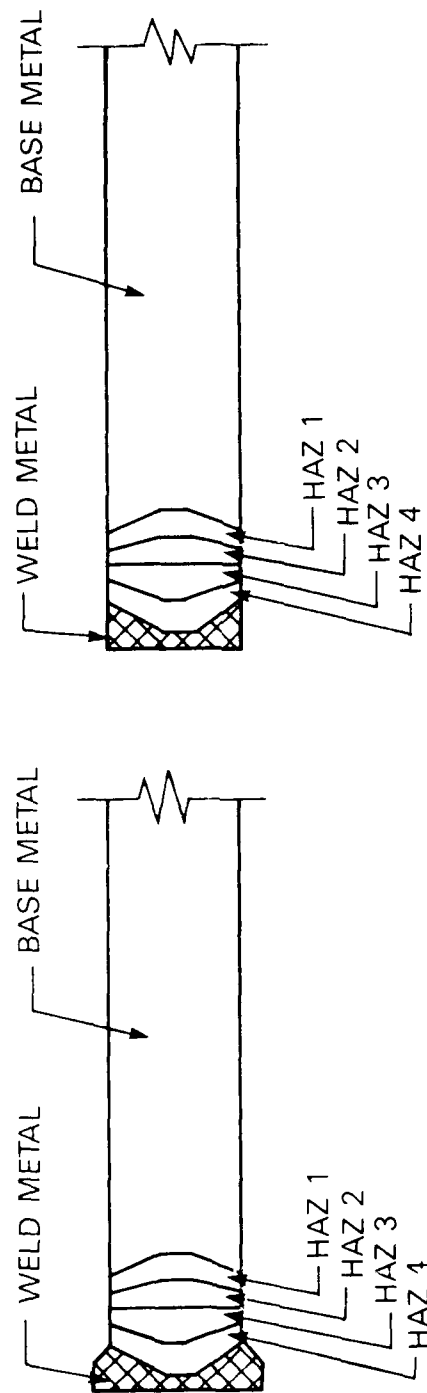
Material zones for welded plate (a) with weld crown (b) without weld crown.
